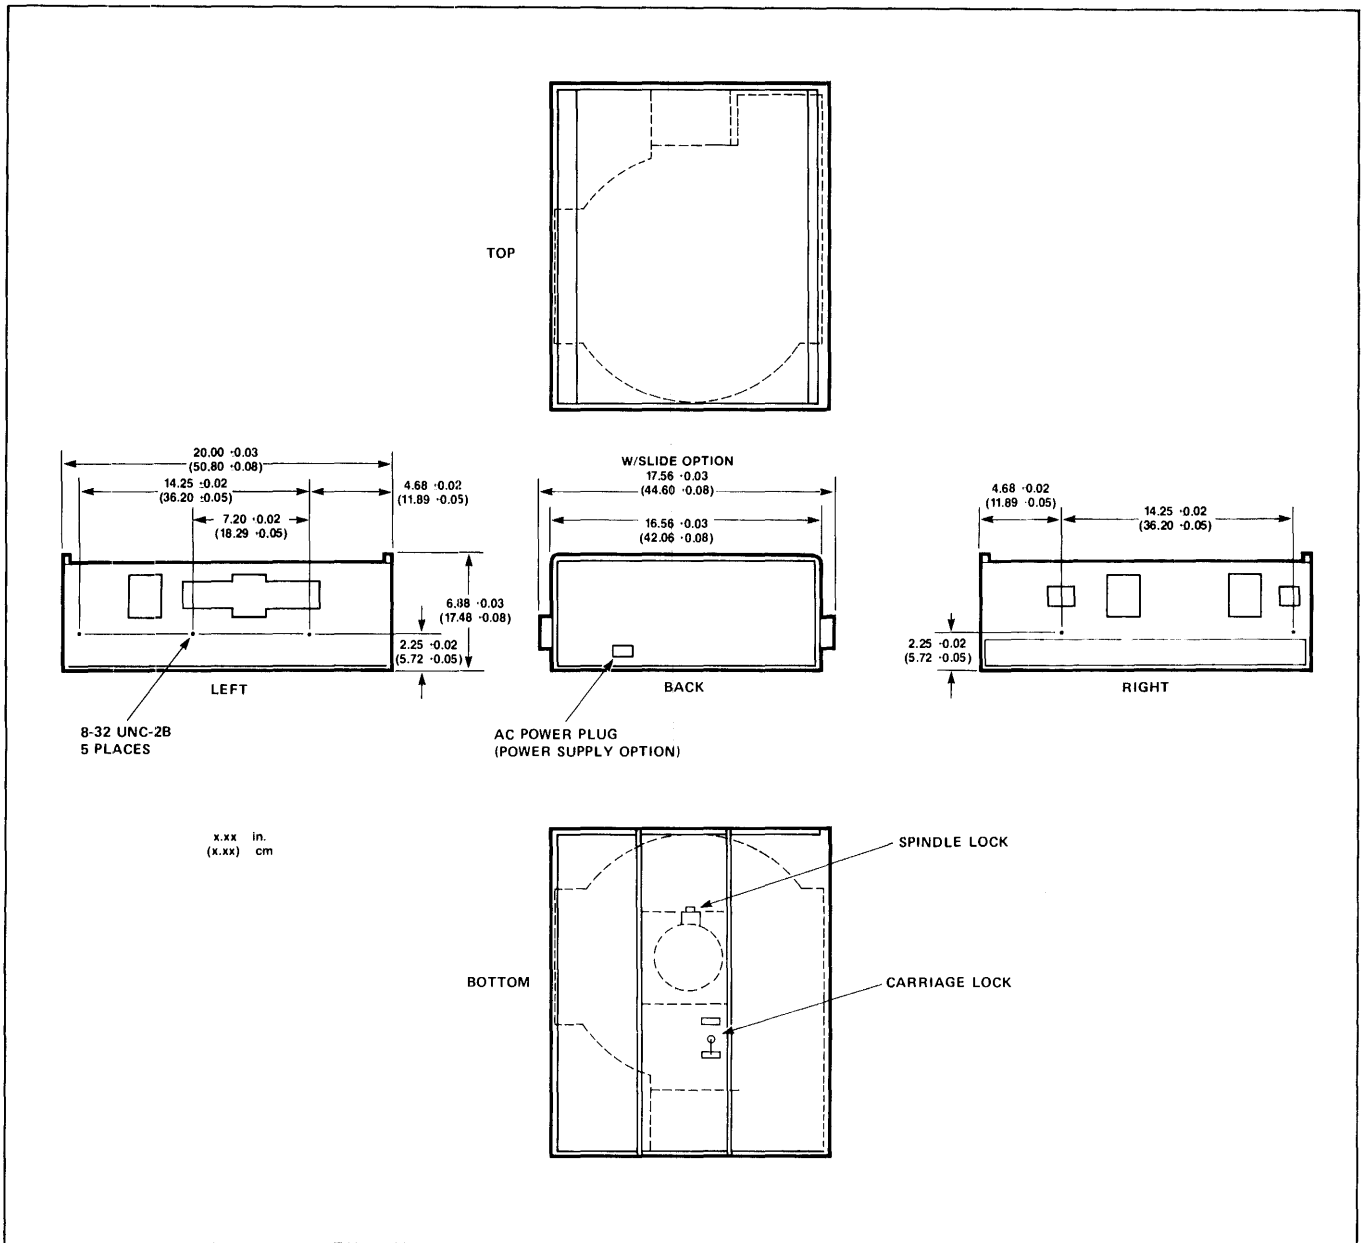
PRIAM 14-Inch Disc Drive Dimensions and Mounting
